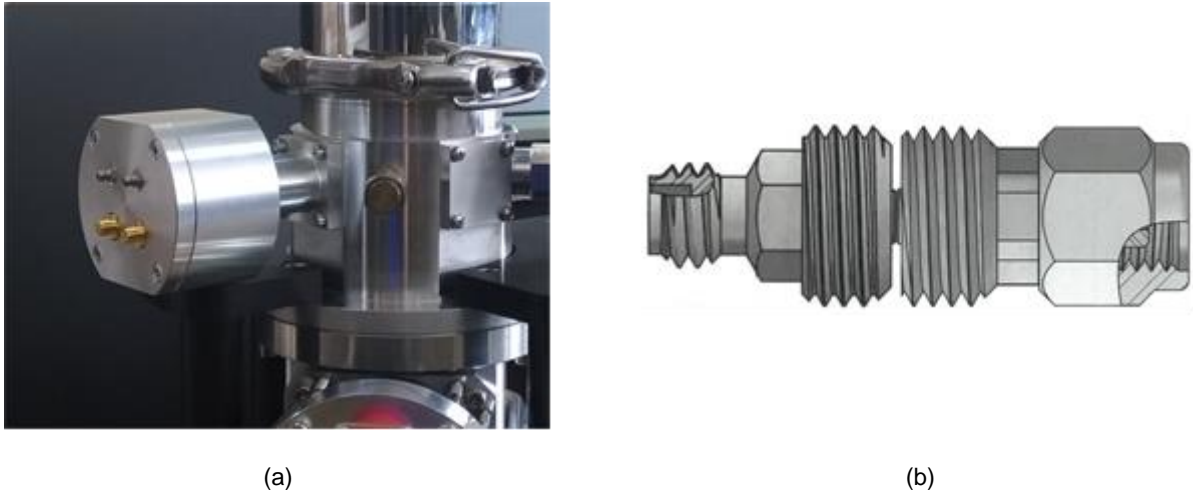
Connections of the cryostat toward the measuring instruments: (a) Adapter and flange with RF and DC connectors; (b) 1.0 mm coaxial back-to-back assembly with "thread-in step-thread" coaxial connectors.
